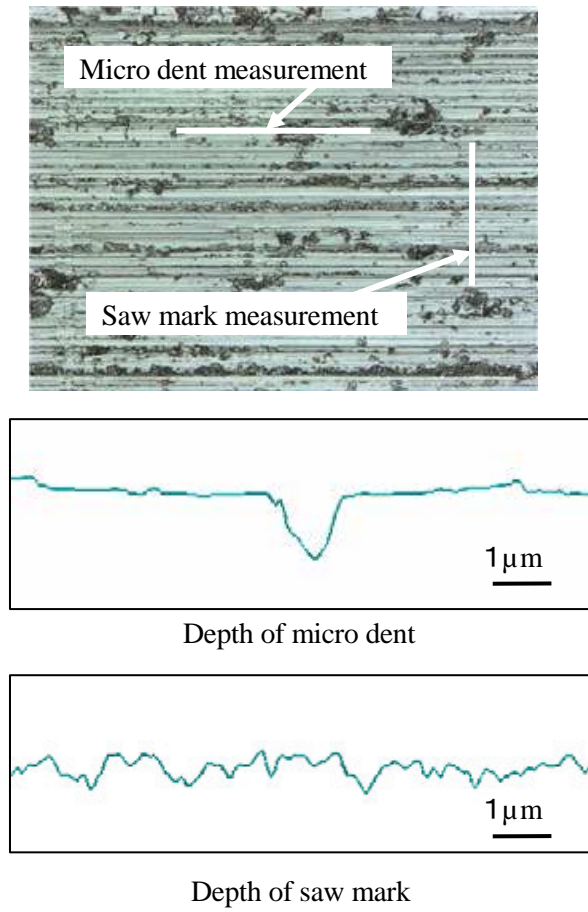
Method for measuring the depth of micro dent and saw mark
